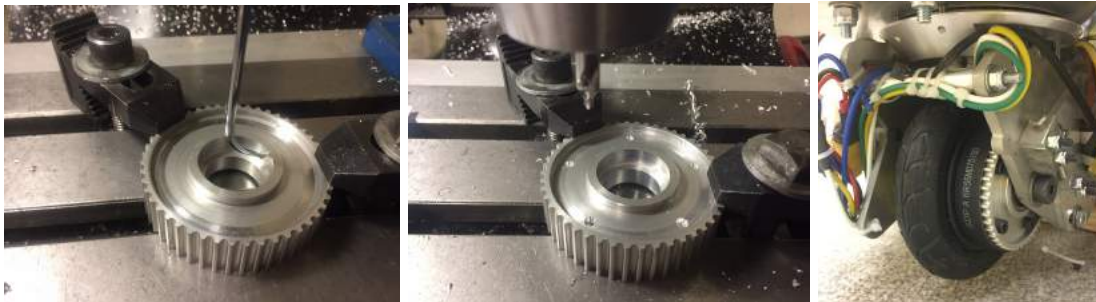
Locating Center (Left), Drilling Hole Pattern (Center), Fully Assembled (Right).
